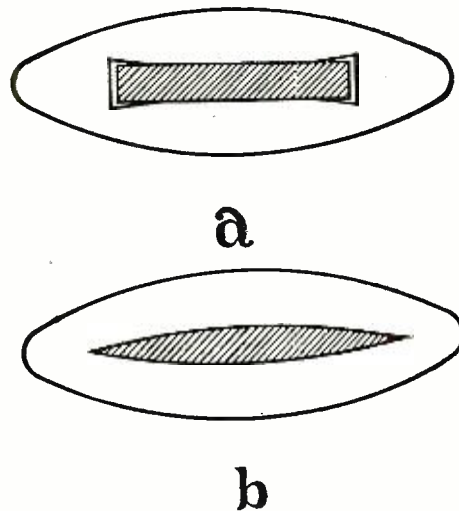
The Method of Sealing Glass and Metal to Hold Vacuum Invented by Mr. Housekeeper, Solved One of the Greatest Problems.
